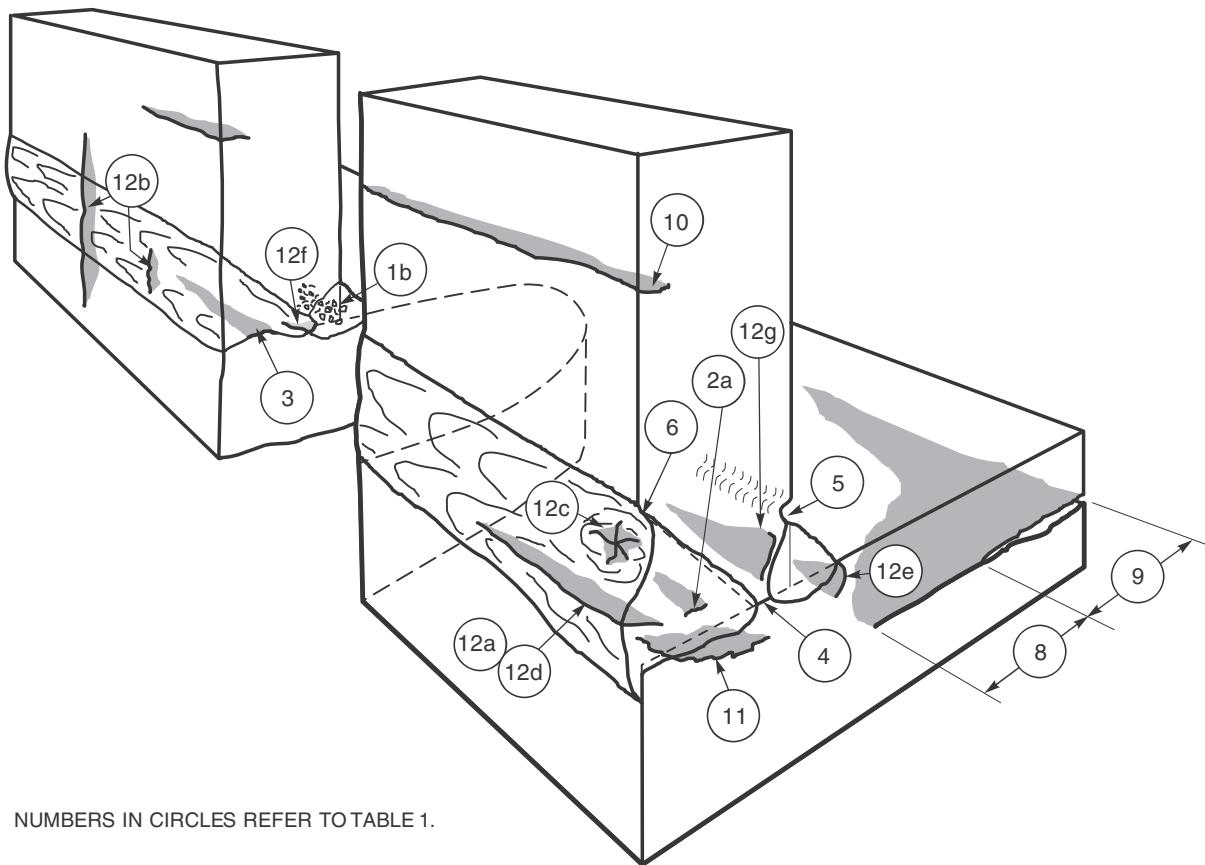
Single-Bevel-Groove and Fillet Welds in Corner Joint
